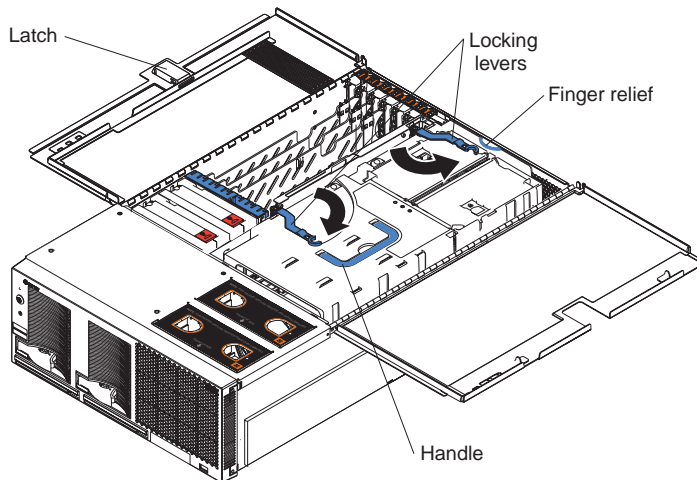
Rotate the locking levers to remove the SMP Expansion Module
